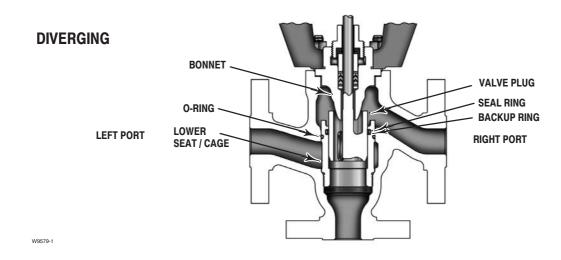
Bottom Port Common Construction Details for Diverging Constructions
